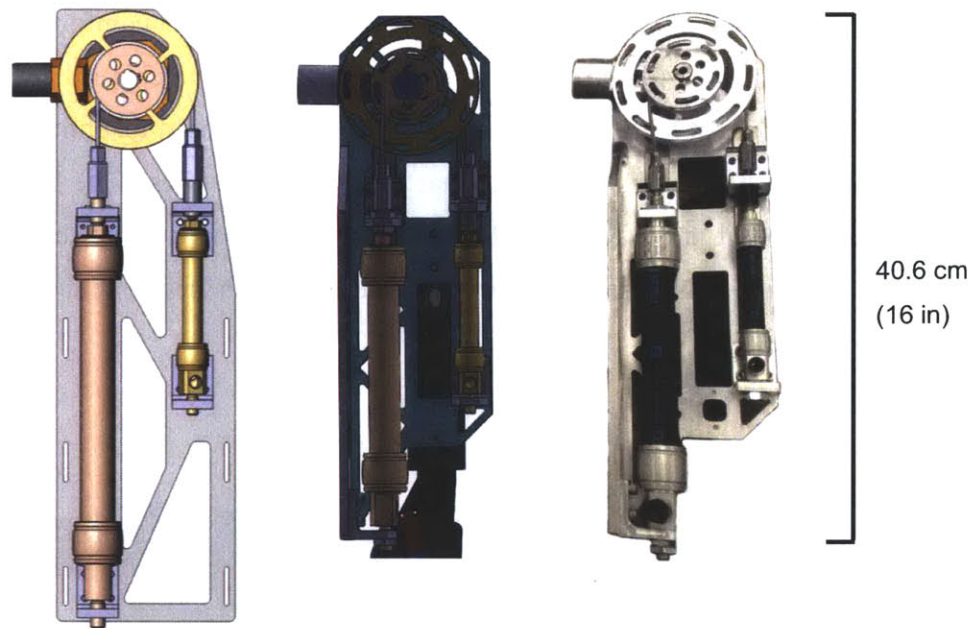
Renderings of prototype I hip flexion extension actuator assembly (A) and final hip flexion/extensions assembly (B)
